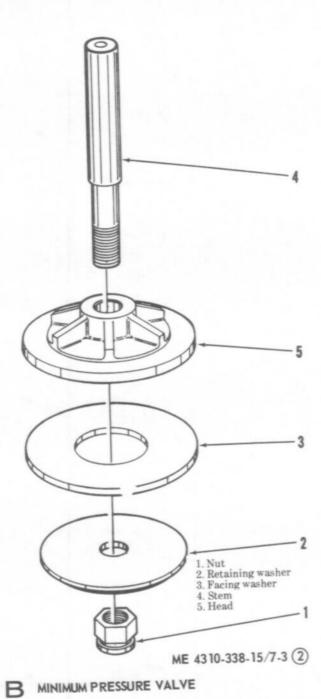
Oil separator assembly, disassembly and reassembly (sheet 2 of 2).
